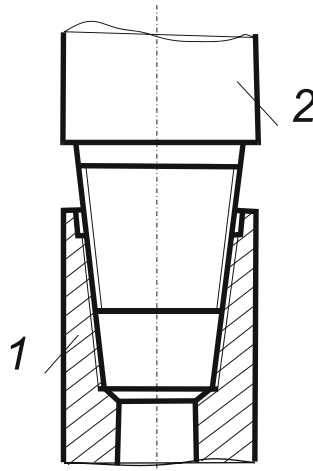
Scheme of the drill string tool-joint consisting: 1 – box; 2 – pin.
